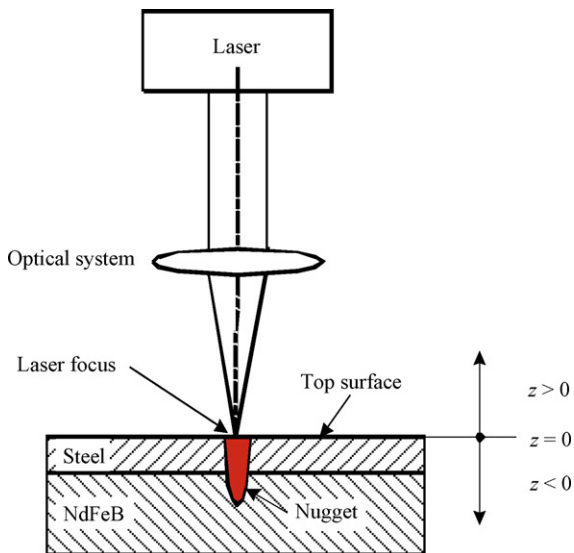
Schematic setup of laser spot welding illustrating the defocusing distance and its sign.
